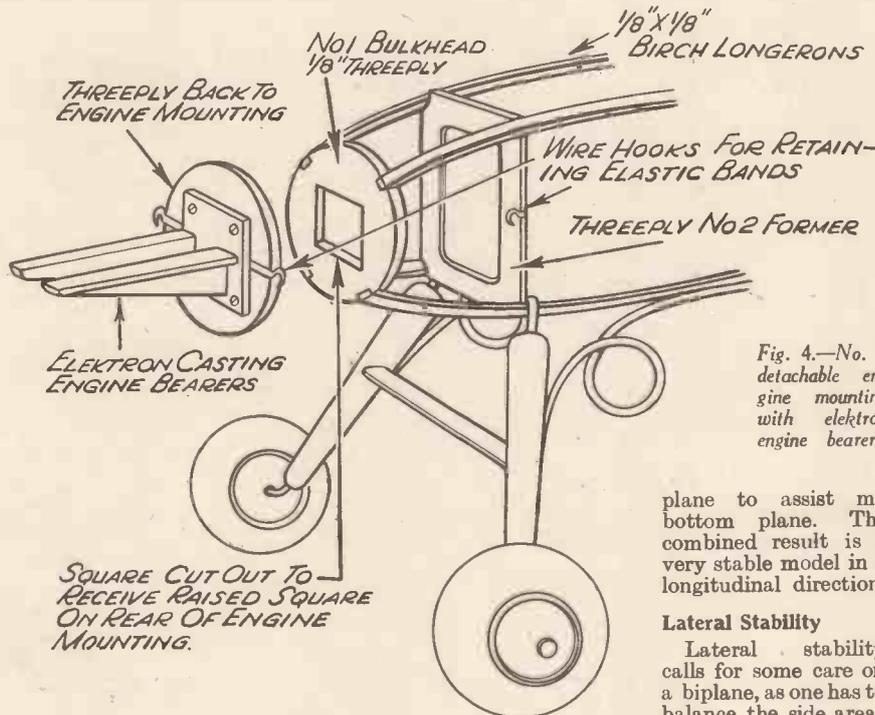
No. 1 detachable engine mounting with elektron engine bearers.
